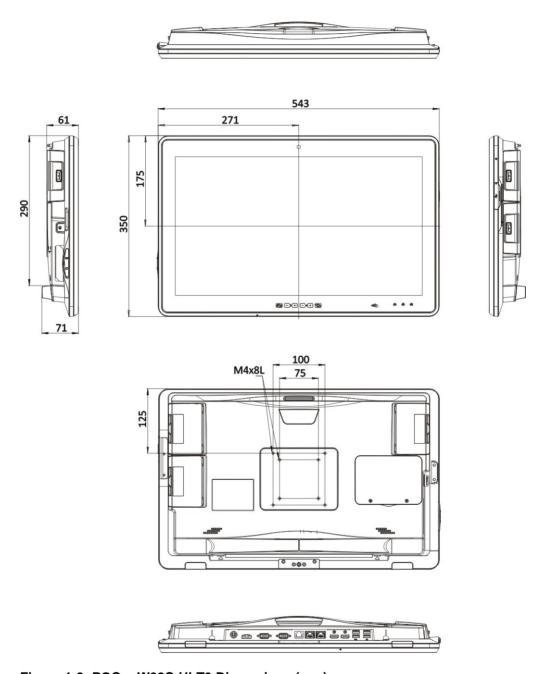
POCm-W22C-ULT3 Dimensions (mm)
